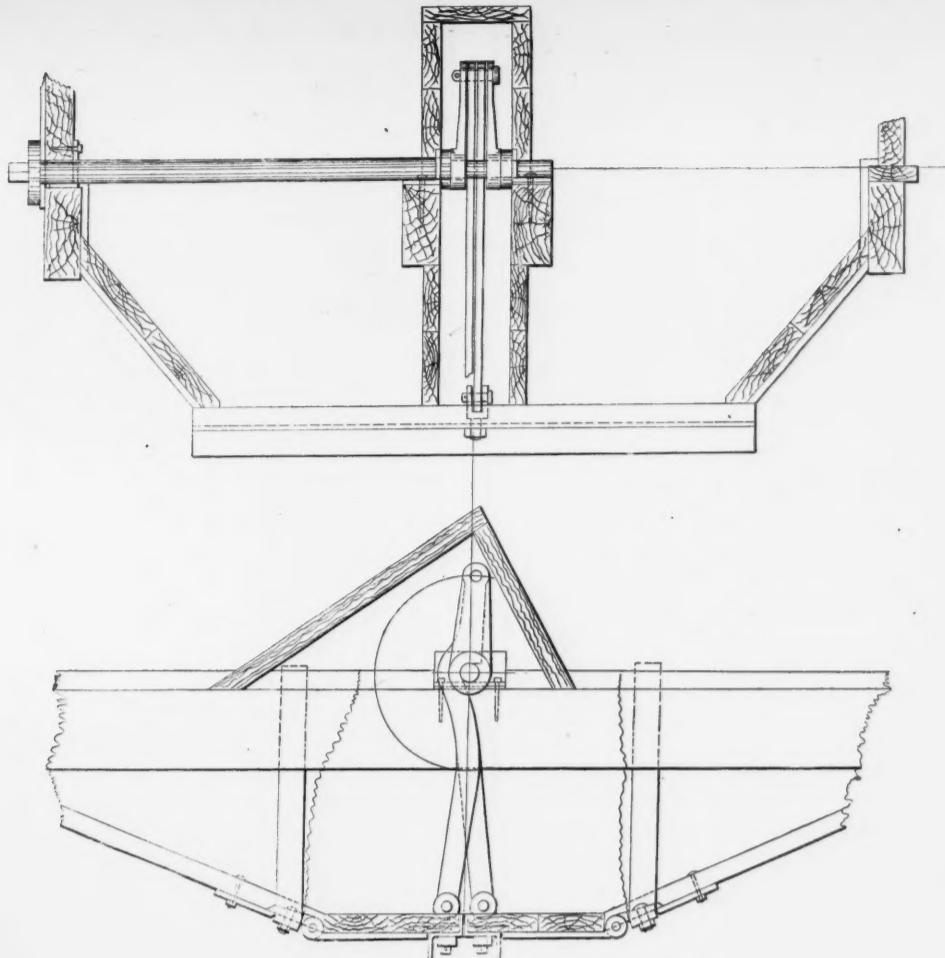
Arrangement of Device with Mechanism at Center of Car.
